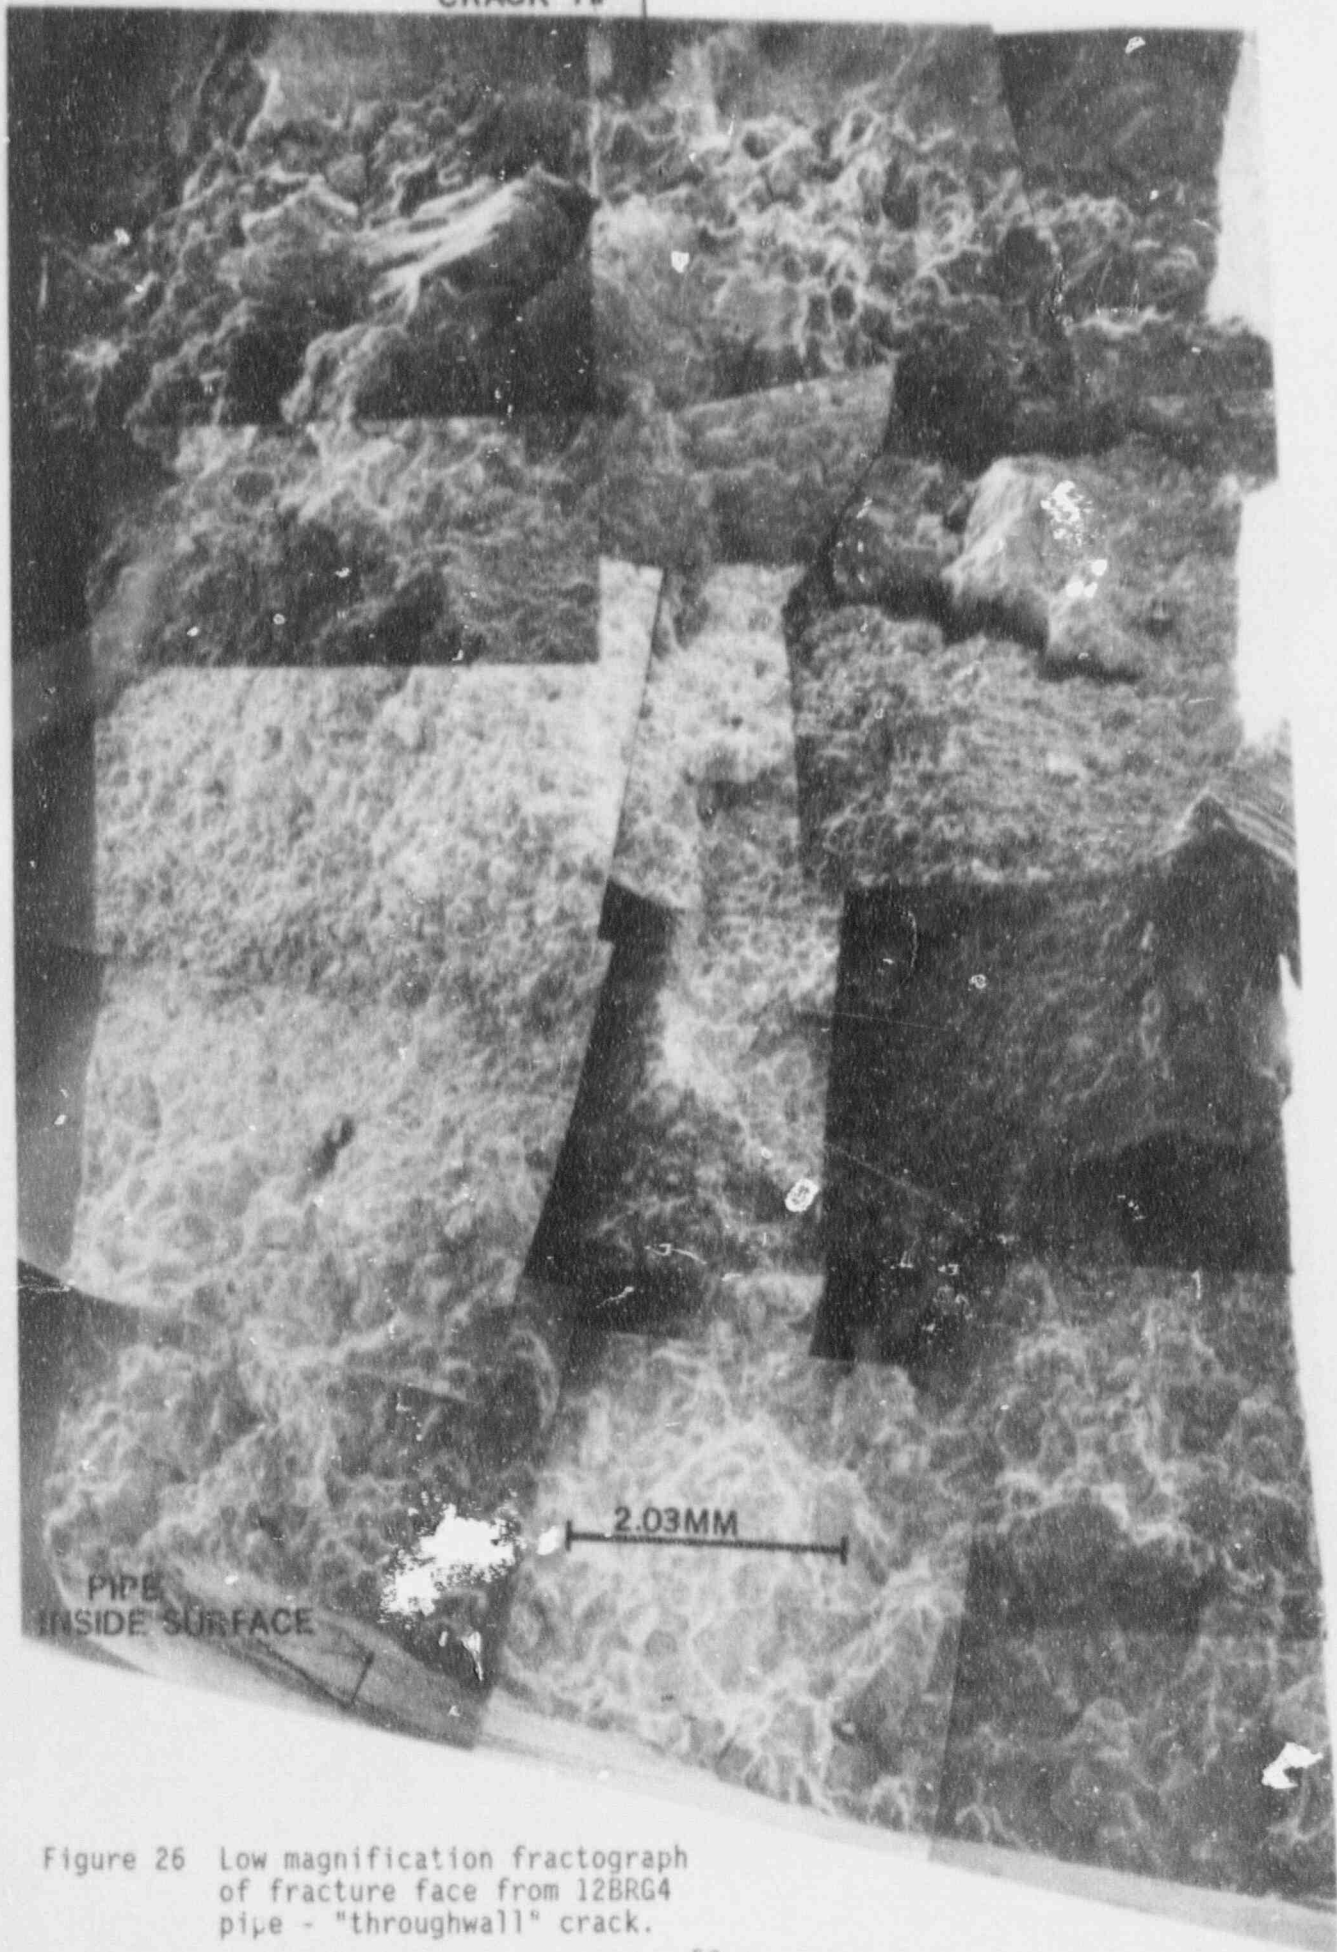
Low magnification fractograph of fracture face from 12BRG4 pipe - "throughwall" crack.
